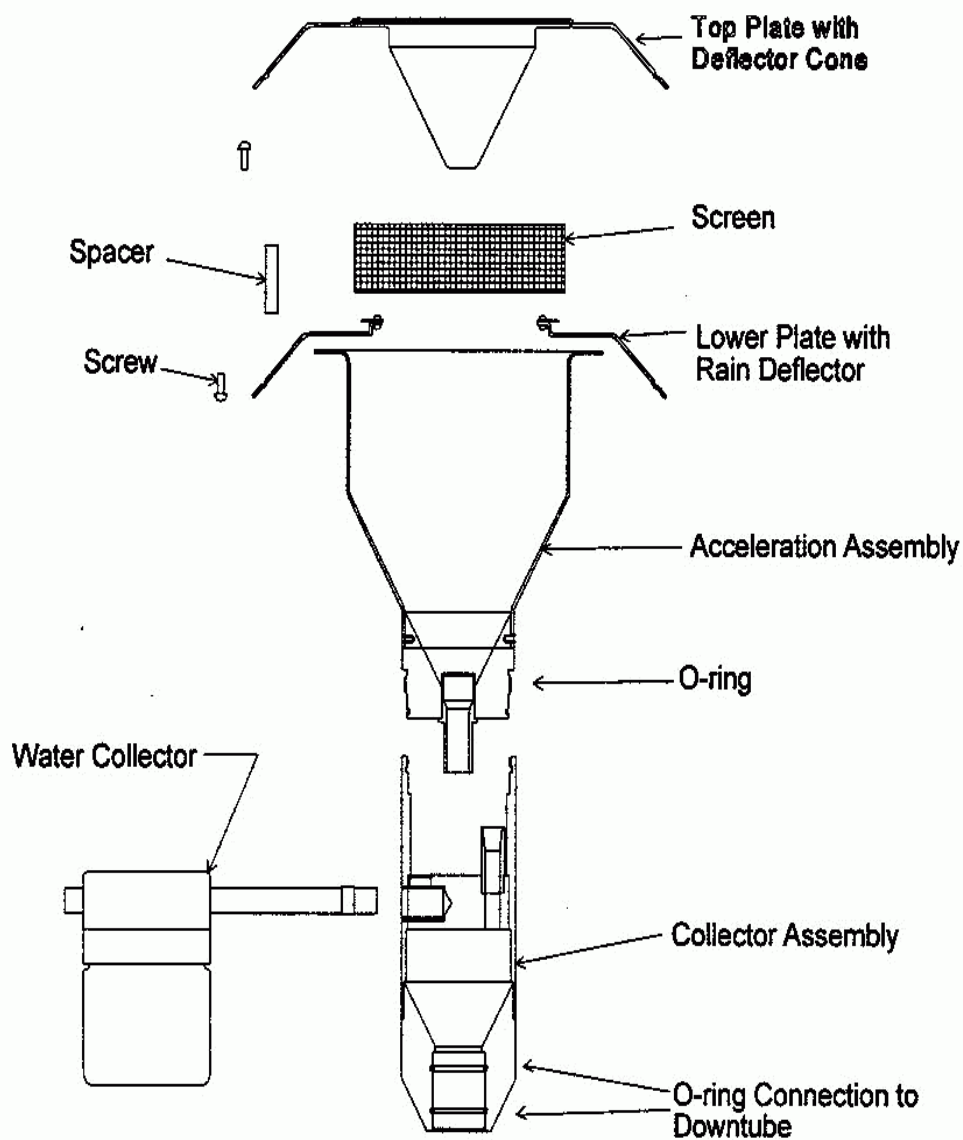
Exploded Cross-Sectional View of PM_{2.5} Sampler Inlet Head
